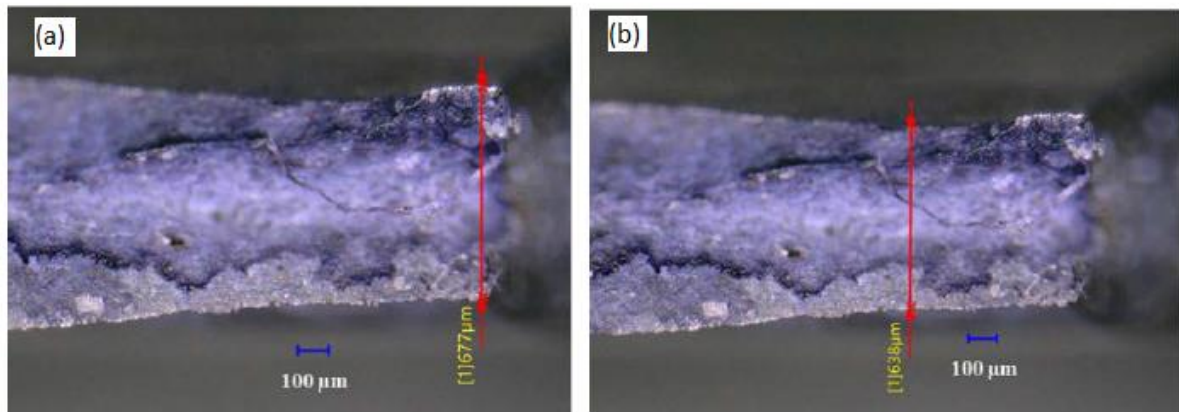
Cross-section of a DP1180 hole tension specimen showing the thickness: (a) at the hole edge; (b) maximum thinning location behind the edge [9].
